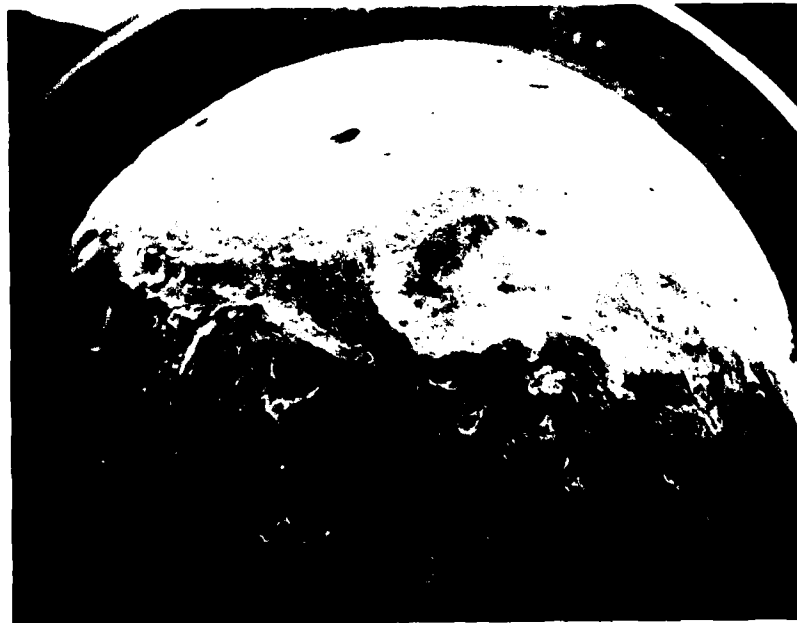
CRATERS OR POOLS ON BALL SURFACE, BEARING "B"
